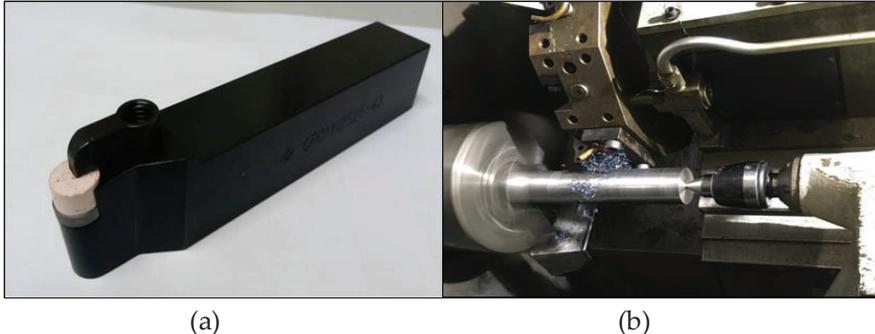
(a) Cutting tool with the design of RNGN120600 clamped in CRDN252543 tool holder and (b) machining setup with AISI 1045 workpiece
